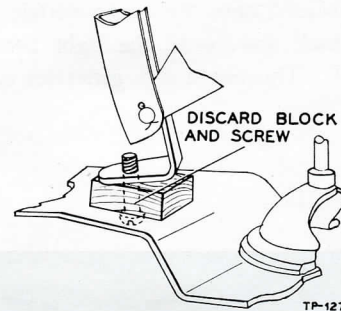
SHIPPING BLOCK—FRONT END OF MOTOR
